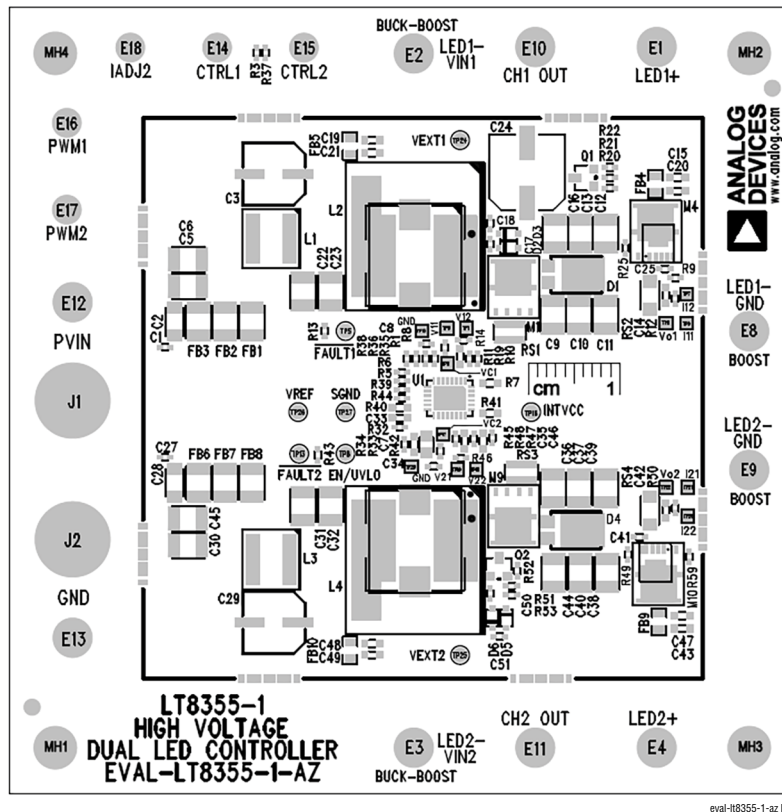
EVAL-LT8355-1-AZ Top Silkscreen Outlining Placement of Shield Clips and EMI Shield on PCB
